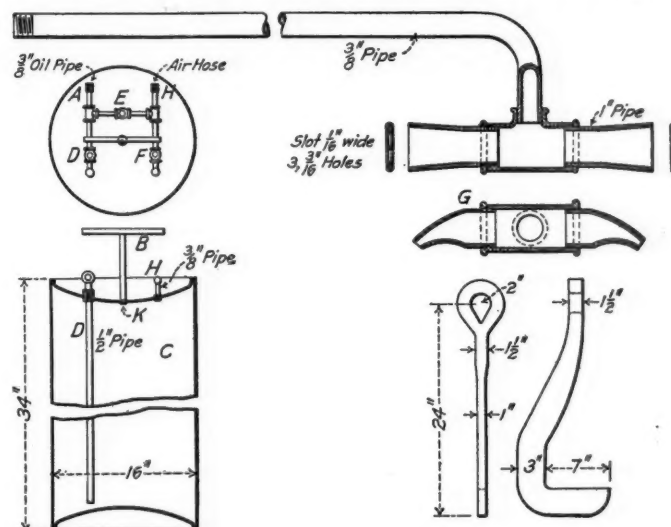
Crude Oil Tank and Burner for Heating Tires.
